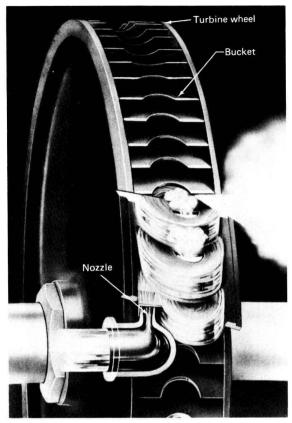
Wheel principle of the helical-flow steam turbine. (Courtesy Terry Corporation—Steam Turbine Division.)
